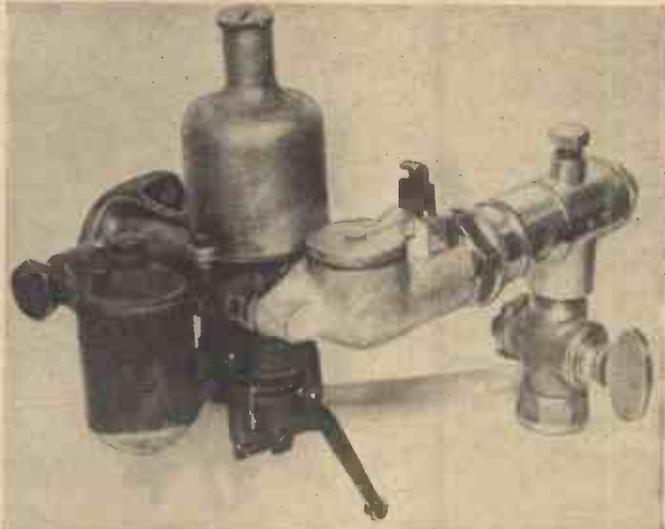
Gas carburettor showing method of fixing to the S.U. petrol carburettor. The air flap is in the closed position for running on gas
